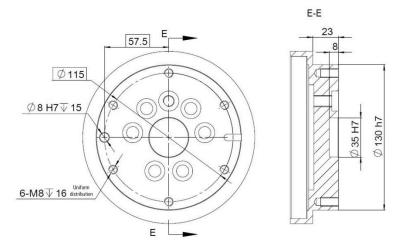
AIR50-2260/AIR80-2260/AIR50-2700/AIR80-2560 wrist flange dimensions
